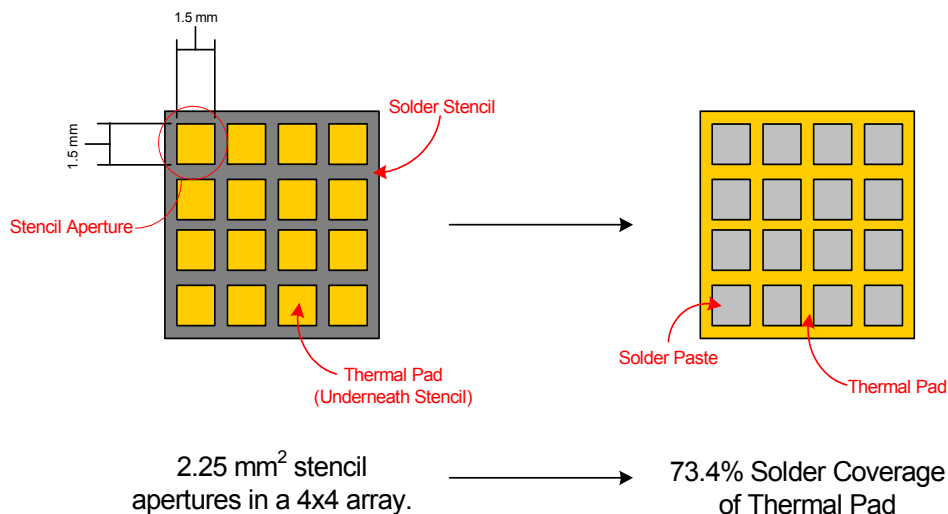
Solder Stencil Apertures for 7 mm x 7 mm Thermal Pad and 73.4% Solder Paste Coverage
